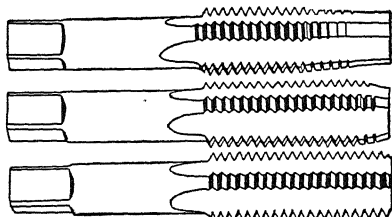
Set of hand taps, taper, plug, and bottoming.
